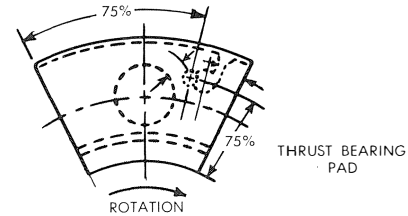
Temperature Sensor Imbedded in Tilt Pad Thrust Bearing.
